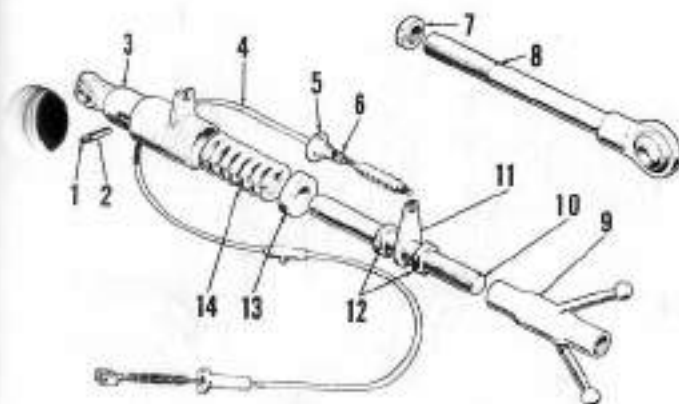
Exploded view of early type single acting draft sensitive top link assembly; refer to Fig. 165 for components of later top link that is draft sensitive when under either tension or compression.
